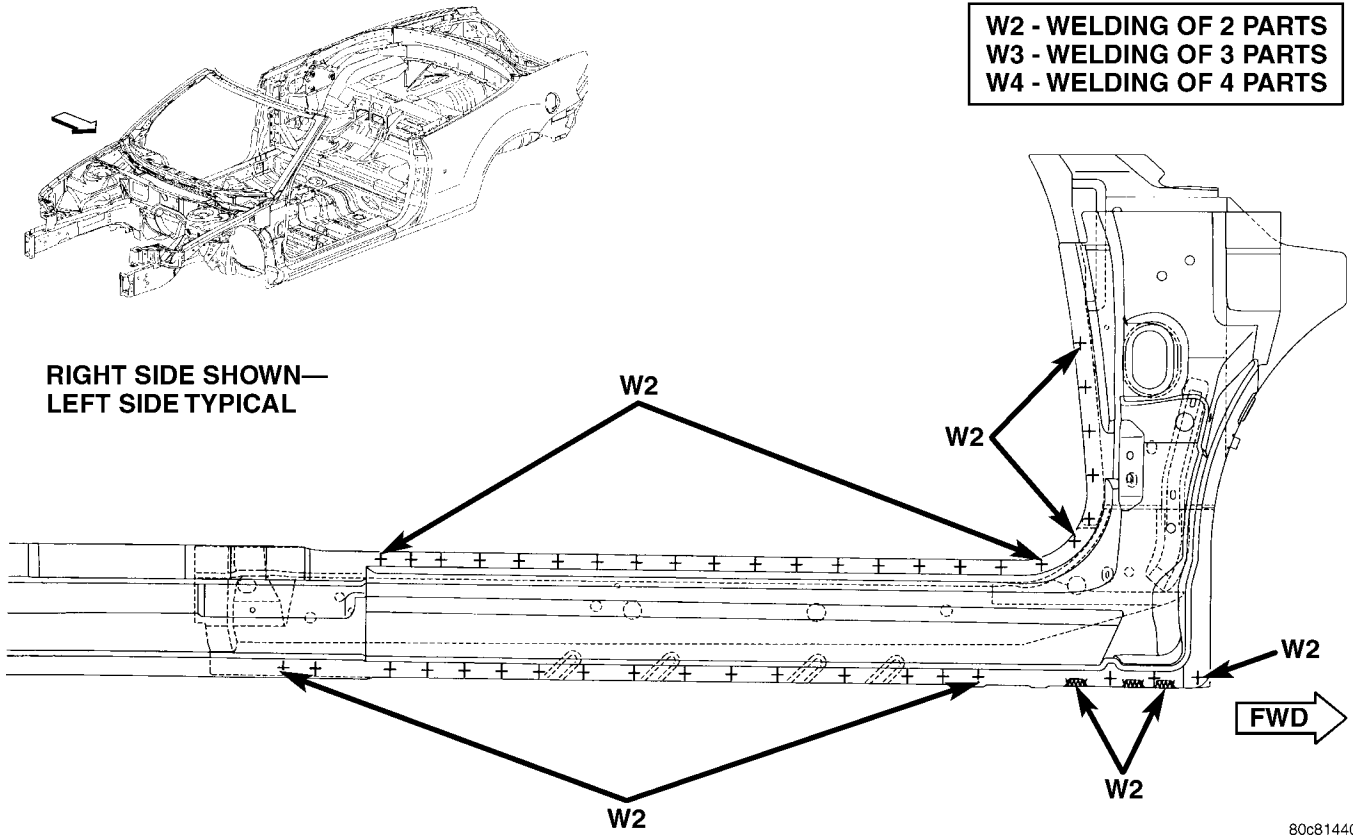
INNER AND OUTER BODY SIDE SILL TO COWL SIDE PANEL
